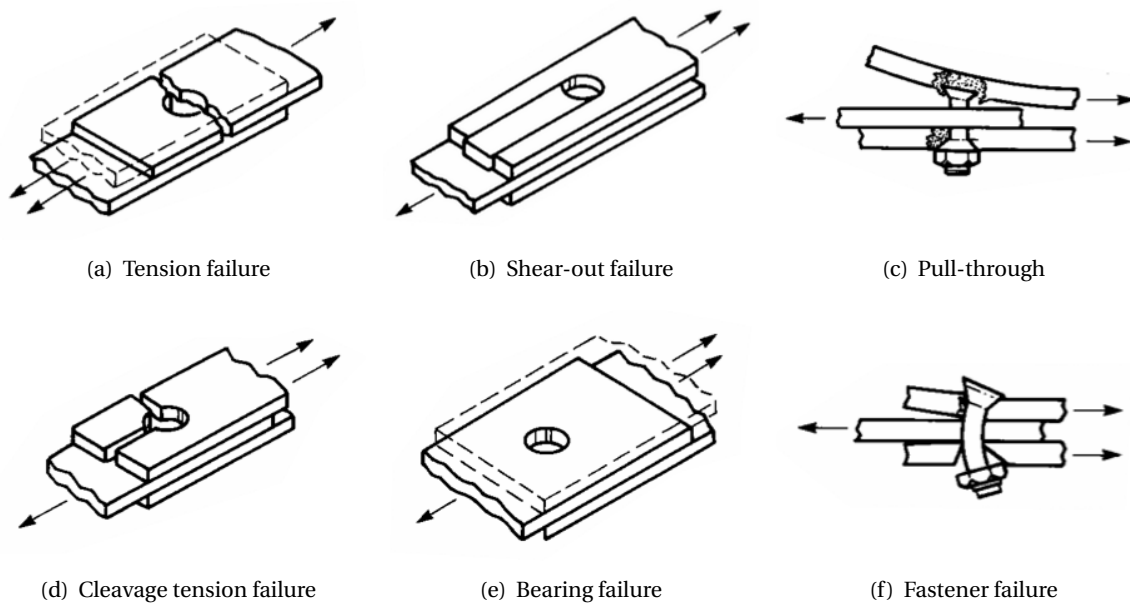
Failure modes in single bolt tension connections [Strong, 2008]
